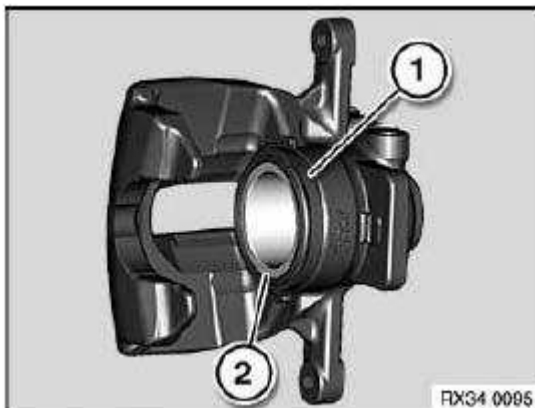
Identifying Dust Sleeve And Contact Face Of Brake Piston
